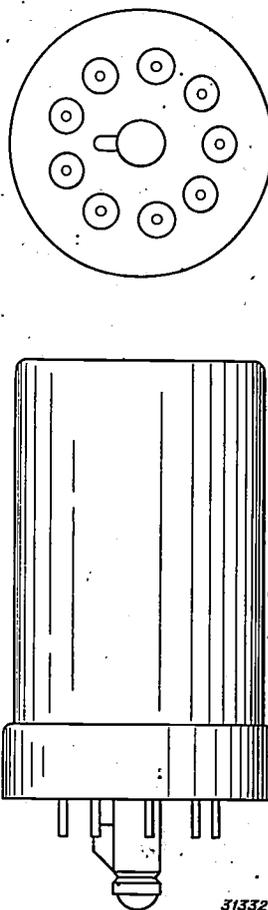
Drawing of the finished valve with protecting tube and pointed cam.
